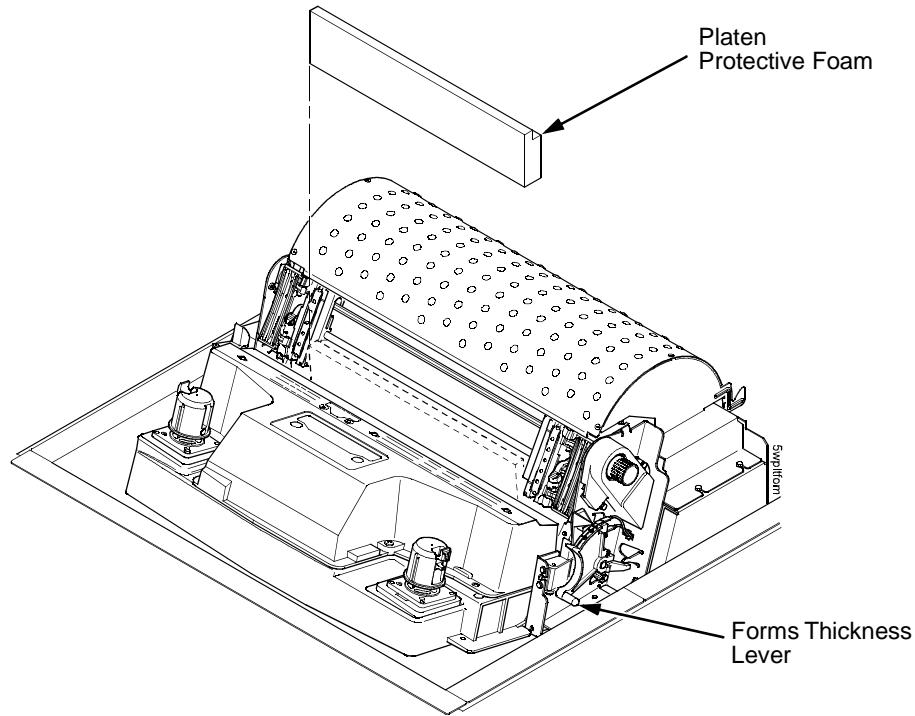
Exploded View of Removal of the Platen Protective Foam, 6400 Series Models
